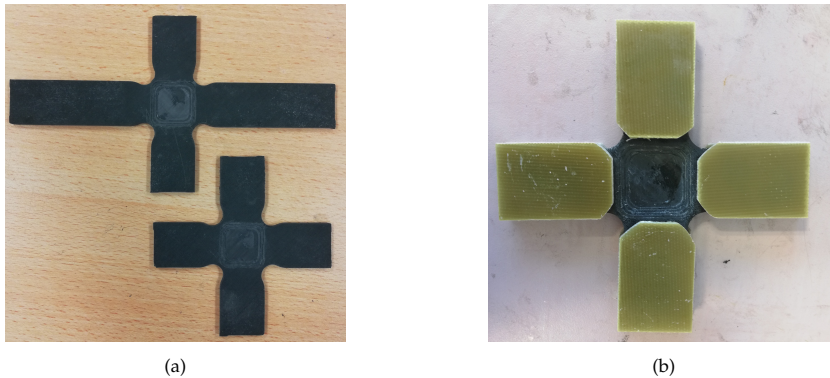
$\pm 45^\circ$ biaxial cruciform specimens: (a) T-C (upper) and C-C (bottom) specimens after CNC milling and (b) C-C specimen after tab gluing.
